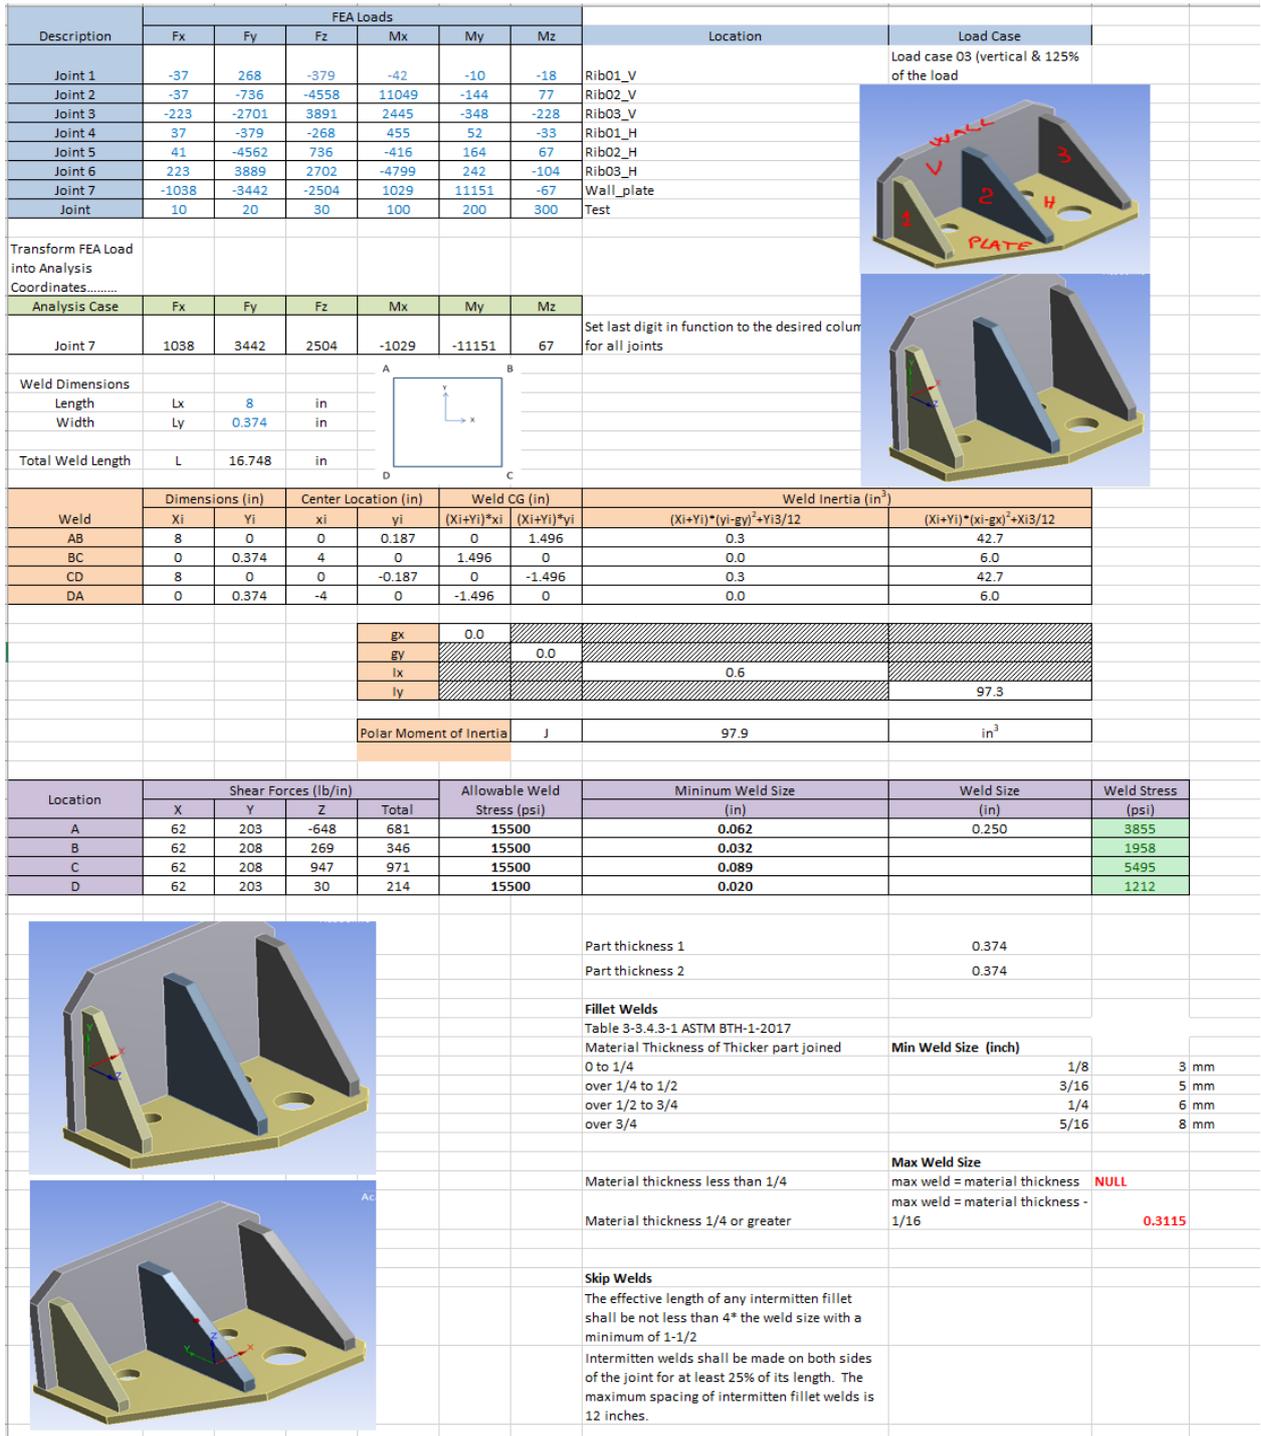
Weld Stress at weld Joint with RICH interface
